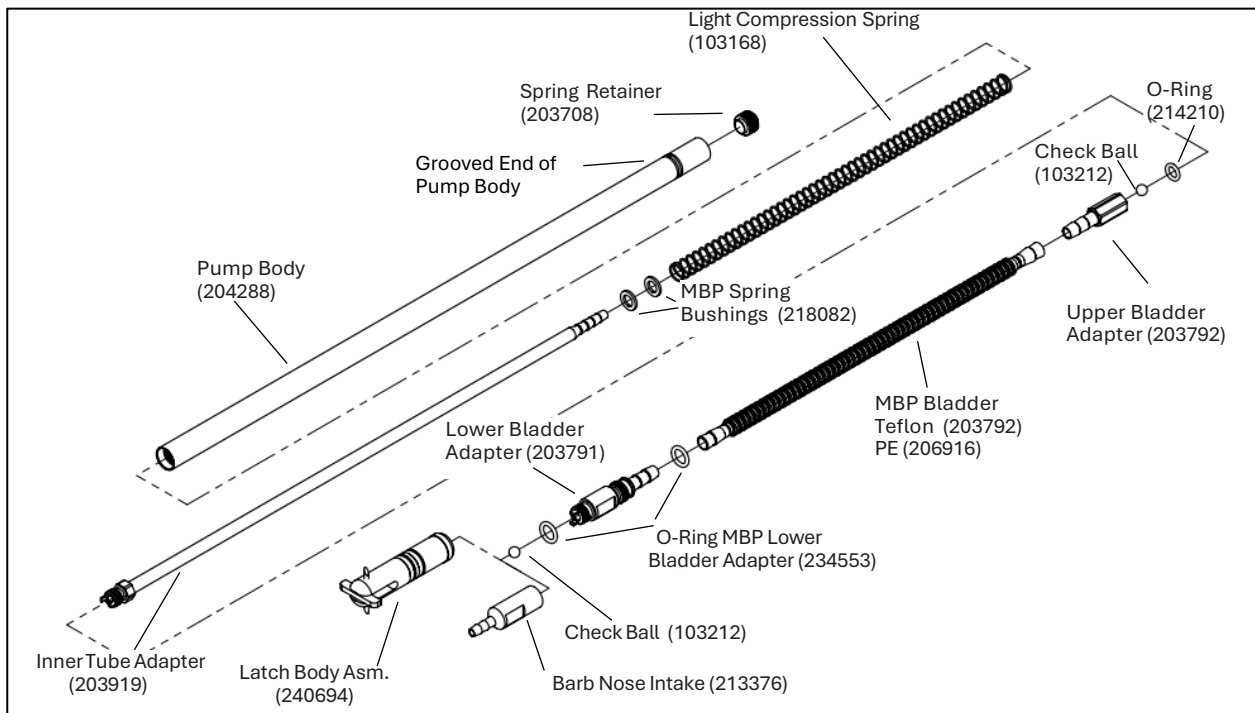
Isometric exploded view of the Mechanical Bladder Pump
